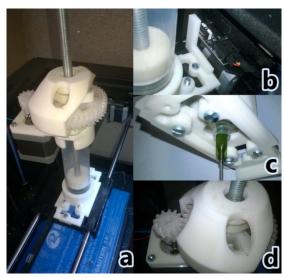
Paste extruder prototype: a) device installed on the 3D printer and loaded with build material; b) end-stop; c) extrusion nozzle; d) herringbone gears.
